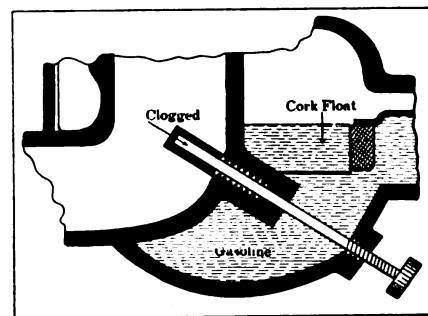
Section through carbureter, showing needle valve which is apt to clog
